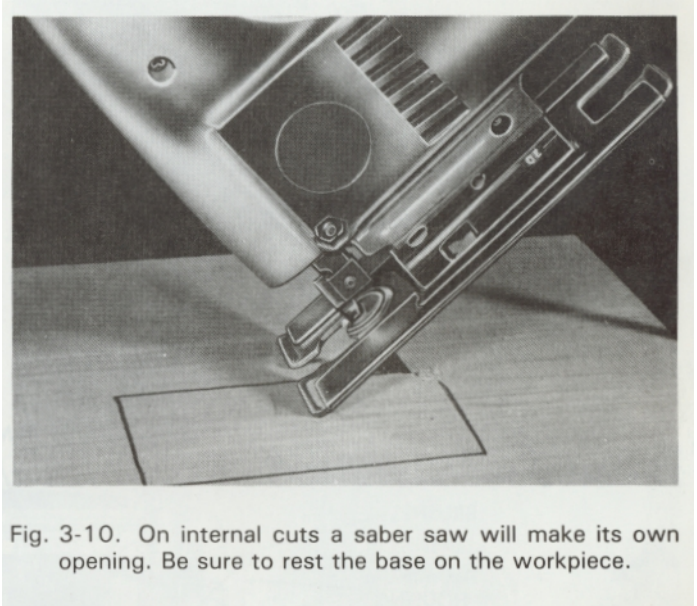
On internal cuts a saber saw will make its own opening. Be sure to rest the base on the workpiece.
